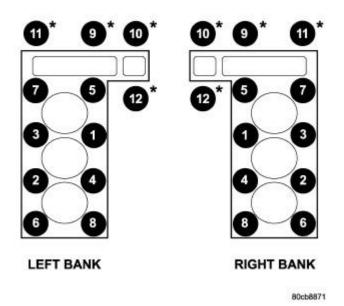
Cylinder Head Tightening Sequence Courtesy of CHRYSLER LLC
